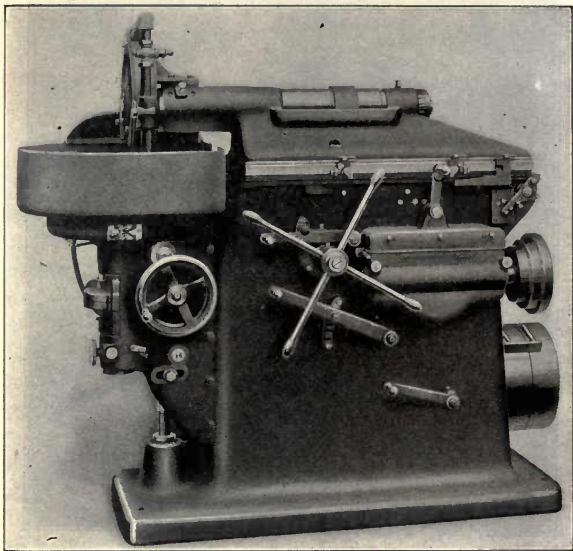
Heald rotary surface grinder arranged for wet grinding.
